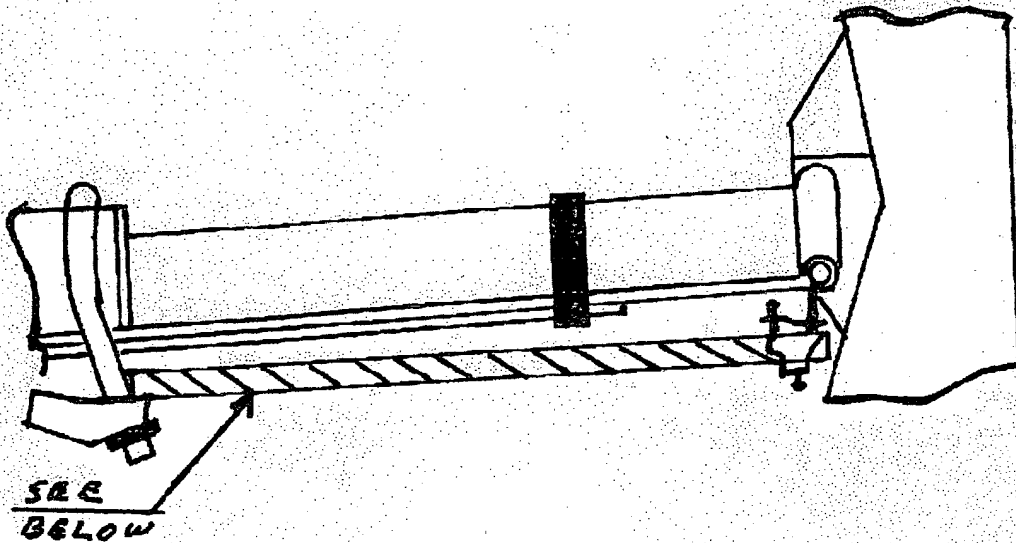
CHECKING SPRING BUSHING TO "U" BOLT
